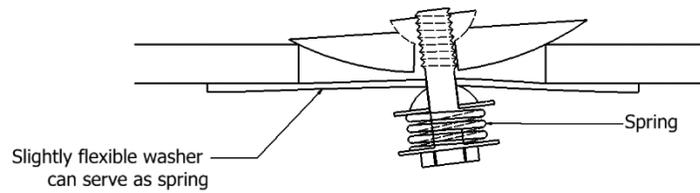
An alternative design. It consists of a slightly flexible washer between the screw and the platform and/or a spring between the screw and the large washer. This can facilitate occasional readjustment of the beam steerer if and when necessary.
